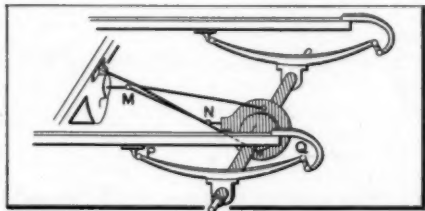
Method of attachment of the springs and torque rod of Fig. 31. It is possible in this type that when the spring deflects, bending strains will be imposed on the chassis members
